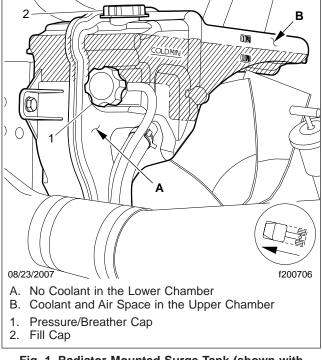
, Radiator-Mounted Surge Tank (shown with engine cold)
